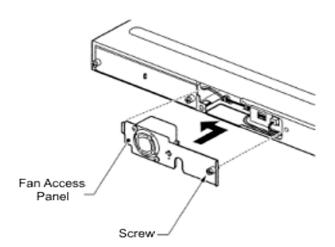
Re-Install Fan Access Panel (CHS1U-US Chassis)
